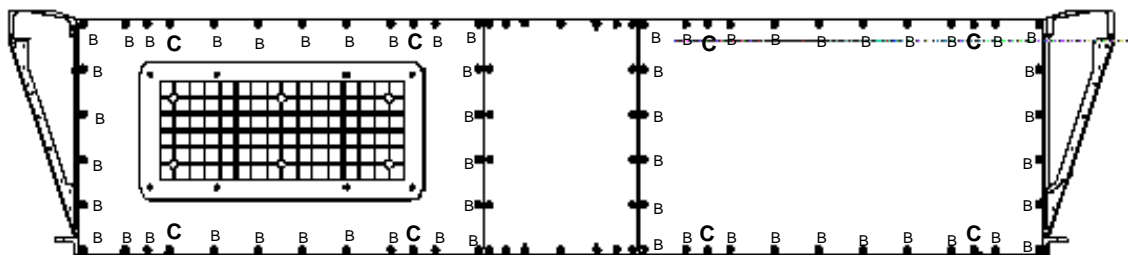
Front view of midbay nadir panels with fasteners marked (C).
